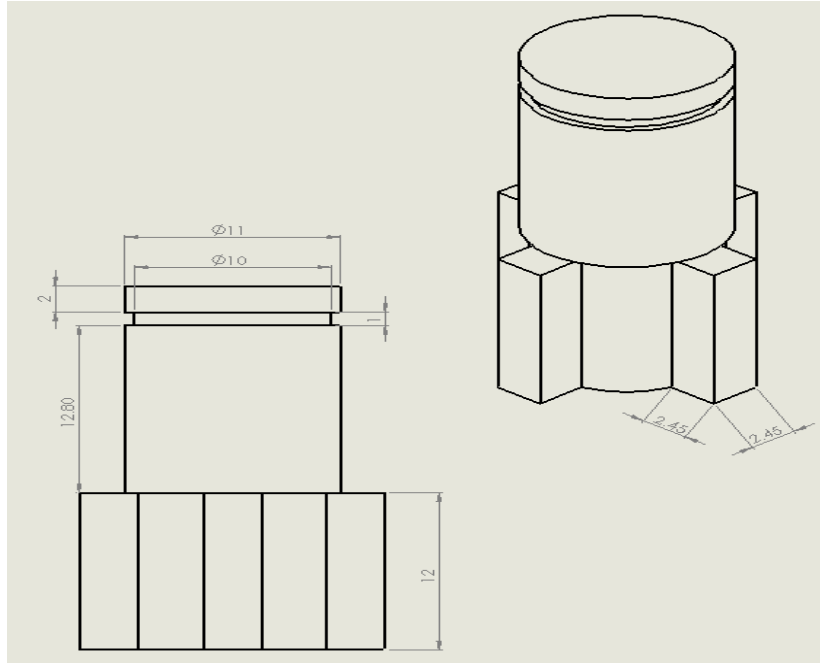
Drawing of the small cylindrical coil support (10 mm diam)
